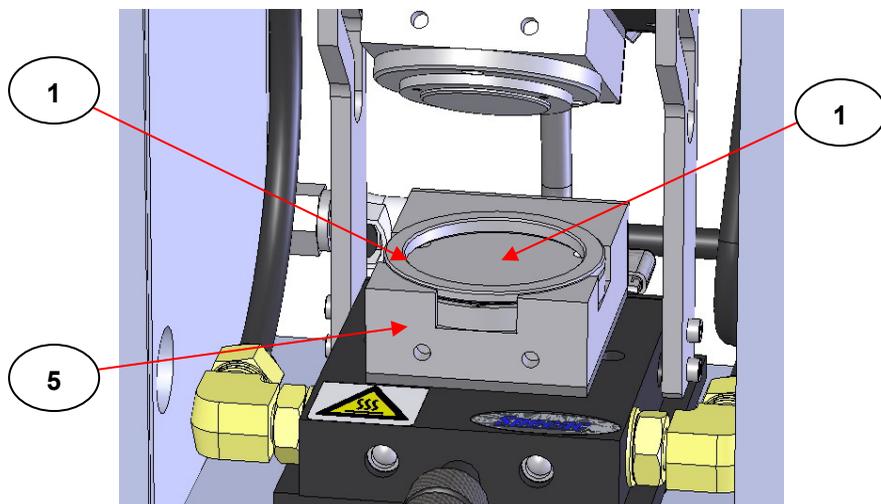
Spacer Ring Positioned in Lower Heated Pressing Surface Assembly
